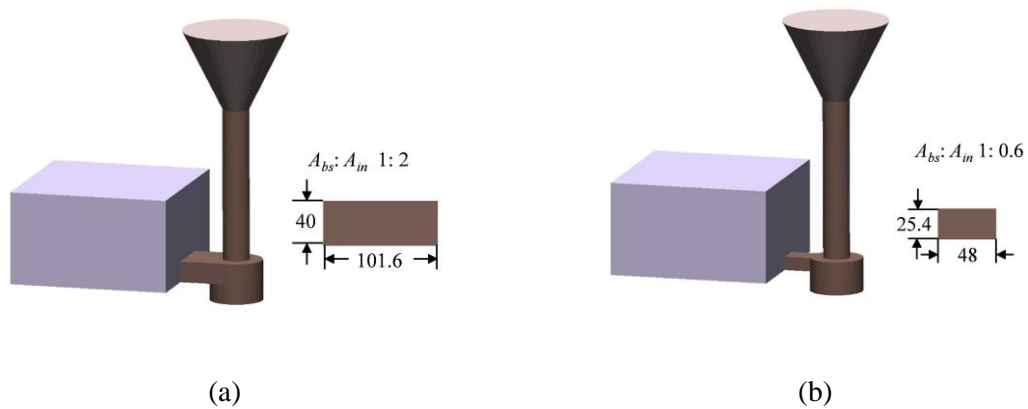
Ingate geometry for (a) the non-pressurized gating system and (b) the pressurized gating system. All dimensions in mm.
